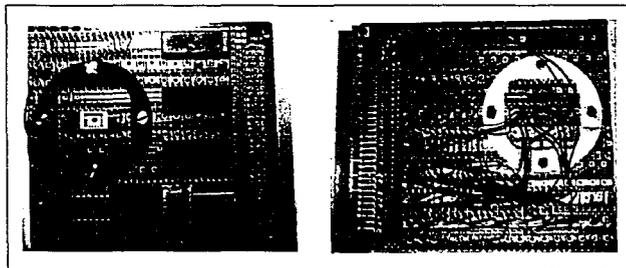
Front and back view of the VCSEL transmitter boards built in a speed-wire board.
